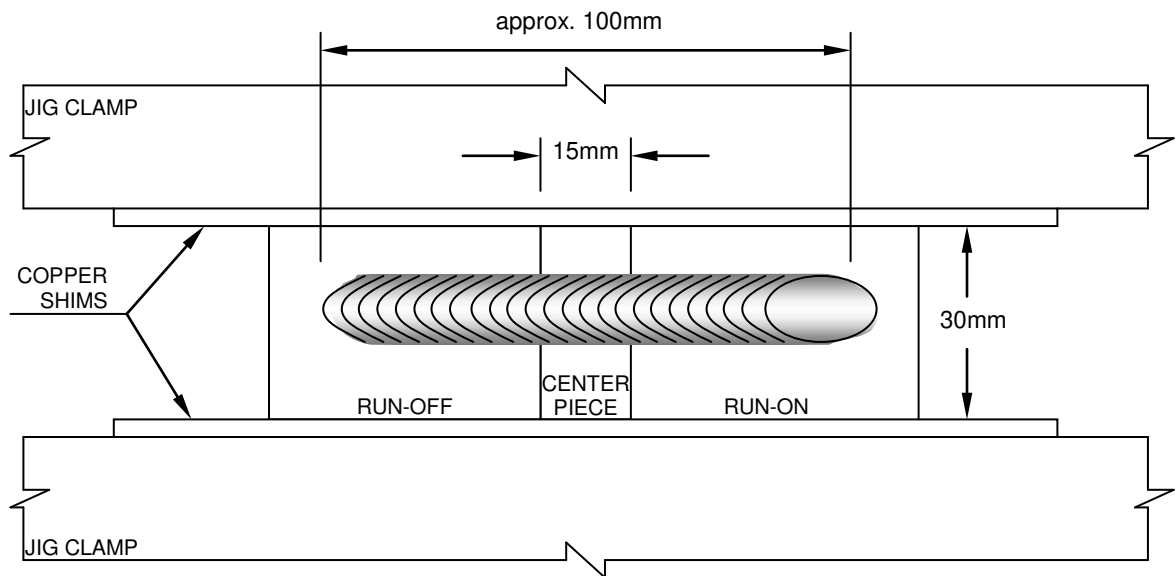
7 A diagram showing the test piece assembly in the welding test jig and a single weld bead. [not to scale]
